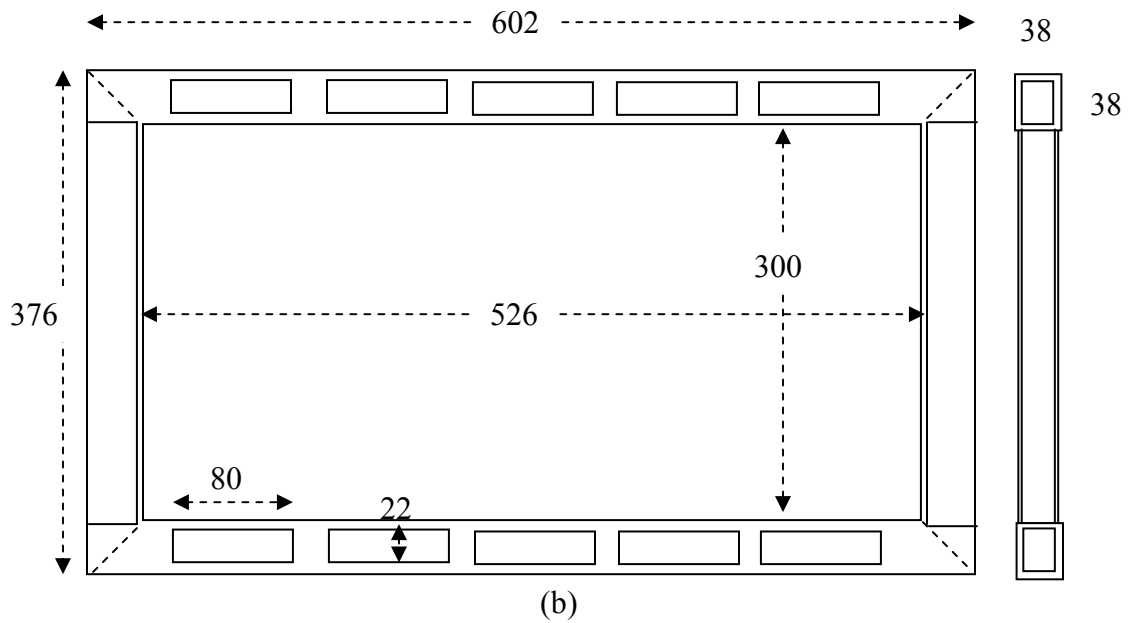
Sectional views of (a) Laminar box + shaking table assembly and (b) Rectangular hollow ring (*continued*)
